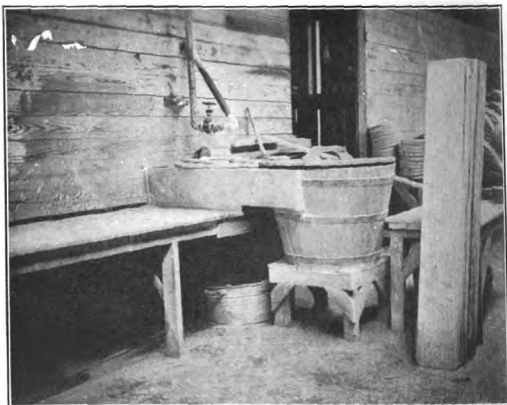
DIPPING TUB, WARE BOARD, ETC., ONE UNIT. NOTE PIPE FOR FILLING TUB INSTEAD OF BUCKET-CARRYING METHOD.
